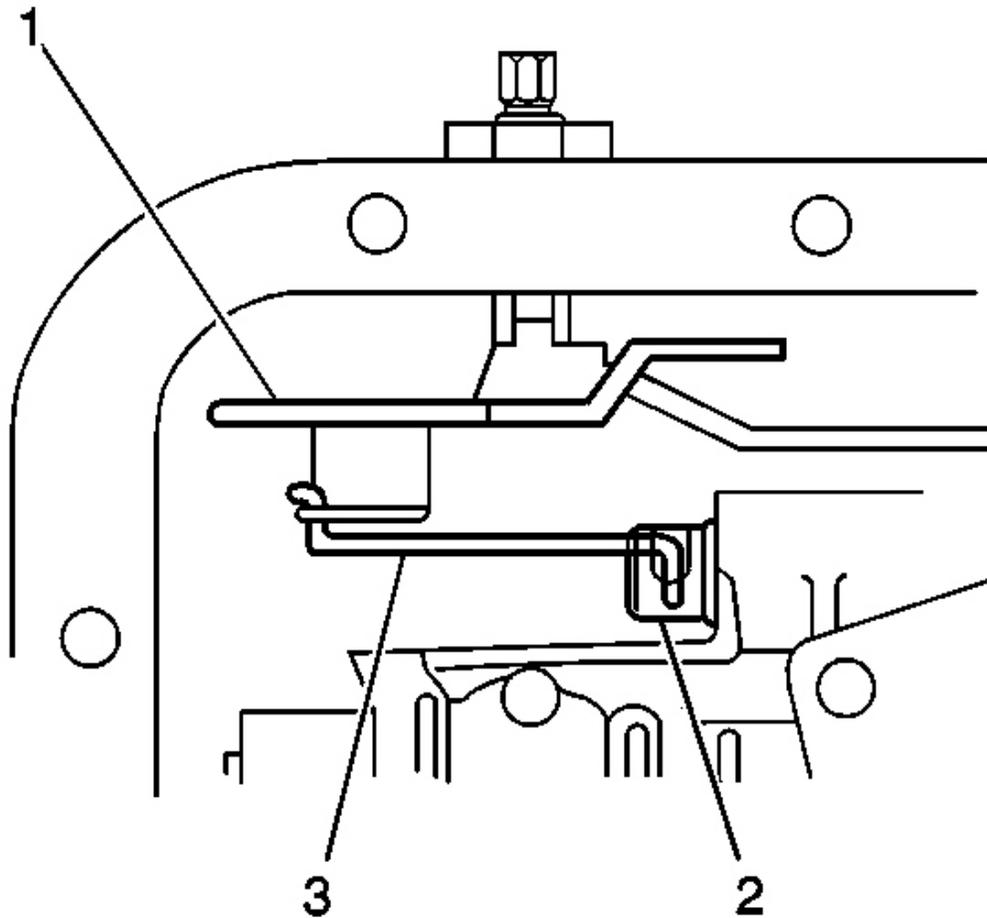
Verifying Manual Valve Link Is Installed Properly To Inside Detent Lever & Manual Valve
